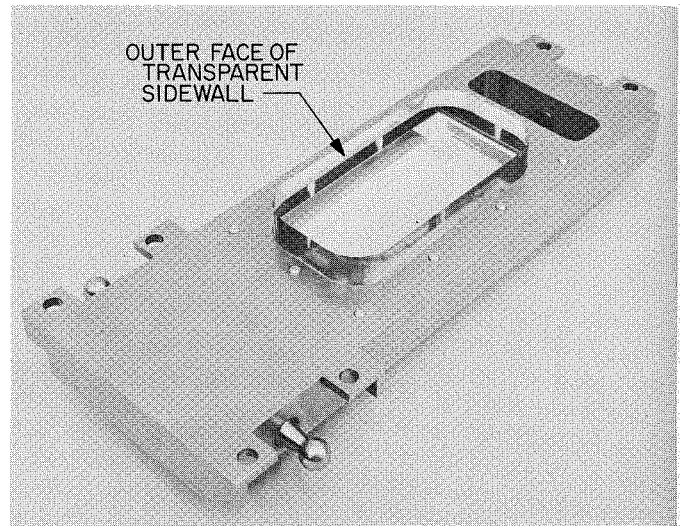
Carriage assembly showing outer face of transparent side wall
